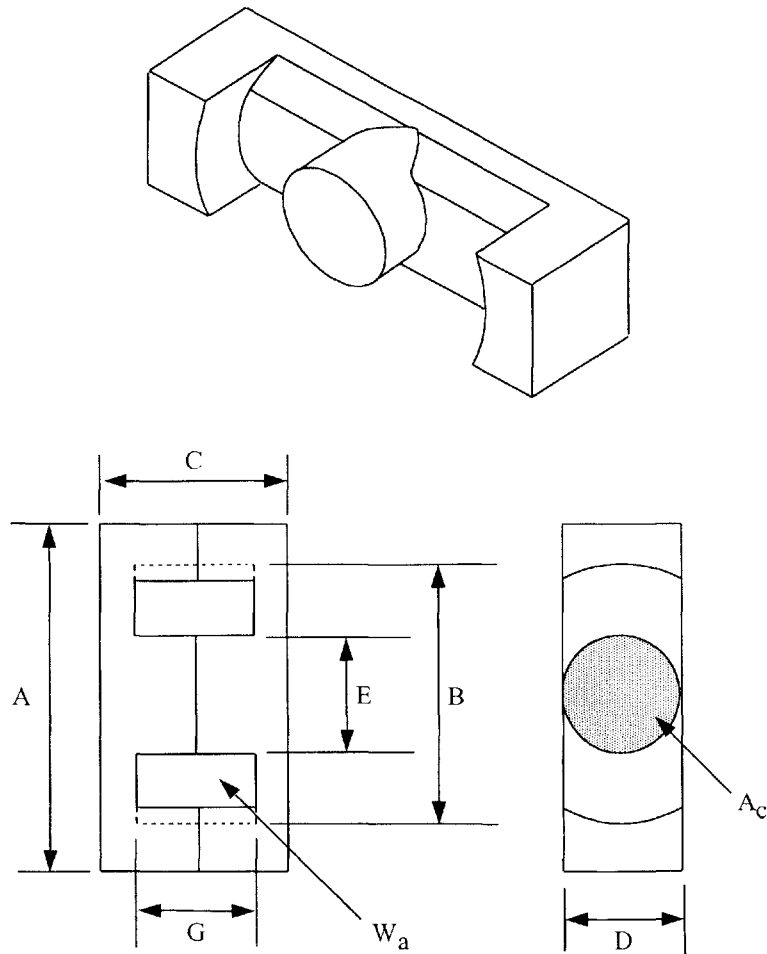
Dimension Outline for ETD Ferrite Cores.
